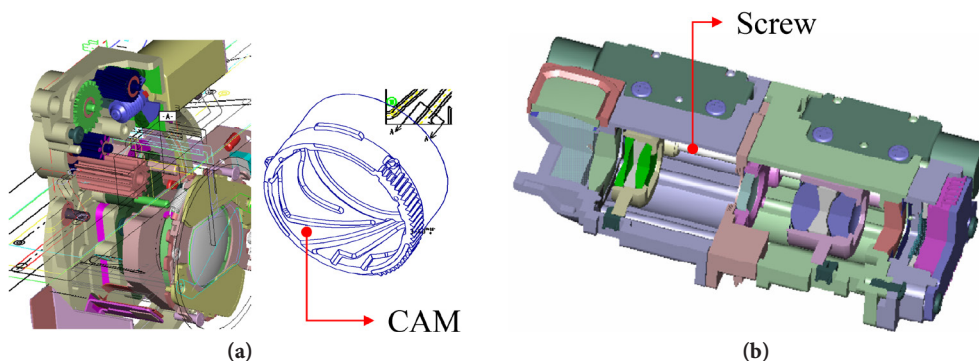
Mechanical layout for zoom lenses. (a) Zoom lens using CAM. (b) Zoom lens using stepping motor and screw.
